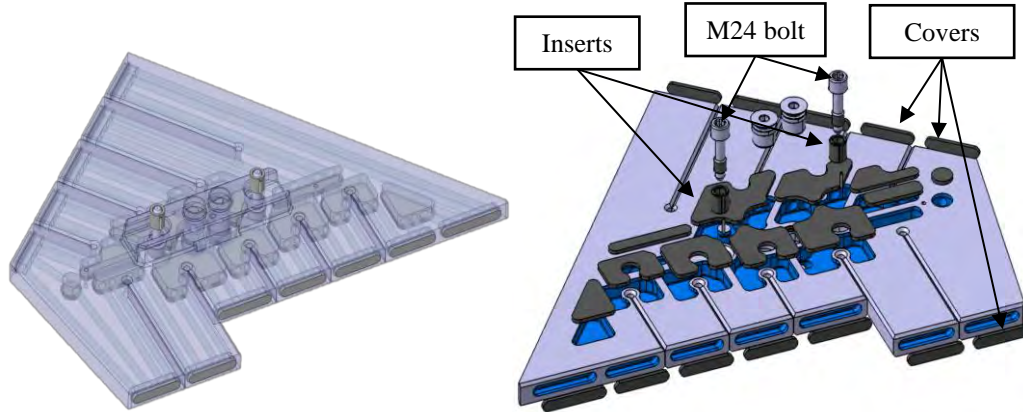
Heating Neutral Beam Plate 14 (for information only)
